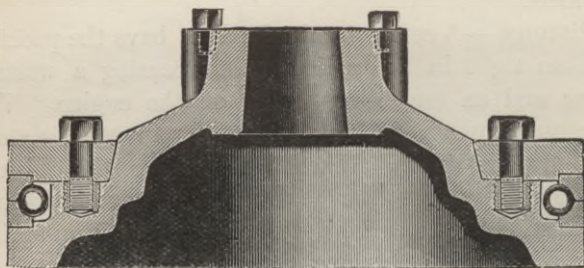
Piston with Lancaster Packing-Rings and Spiral Spring.
